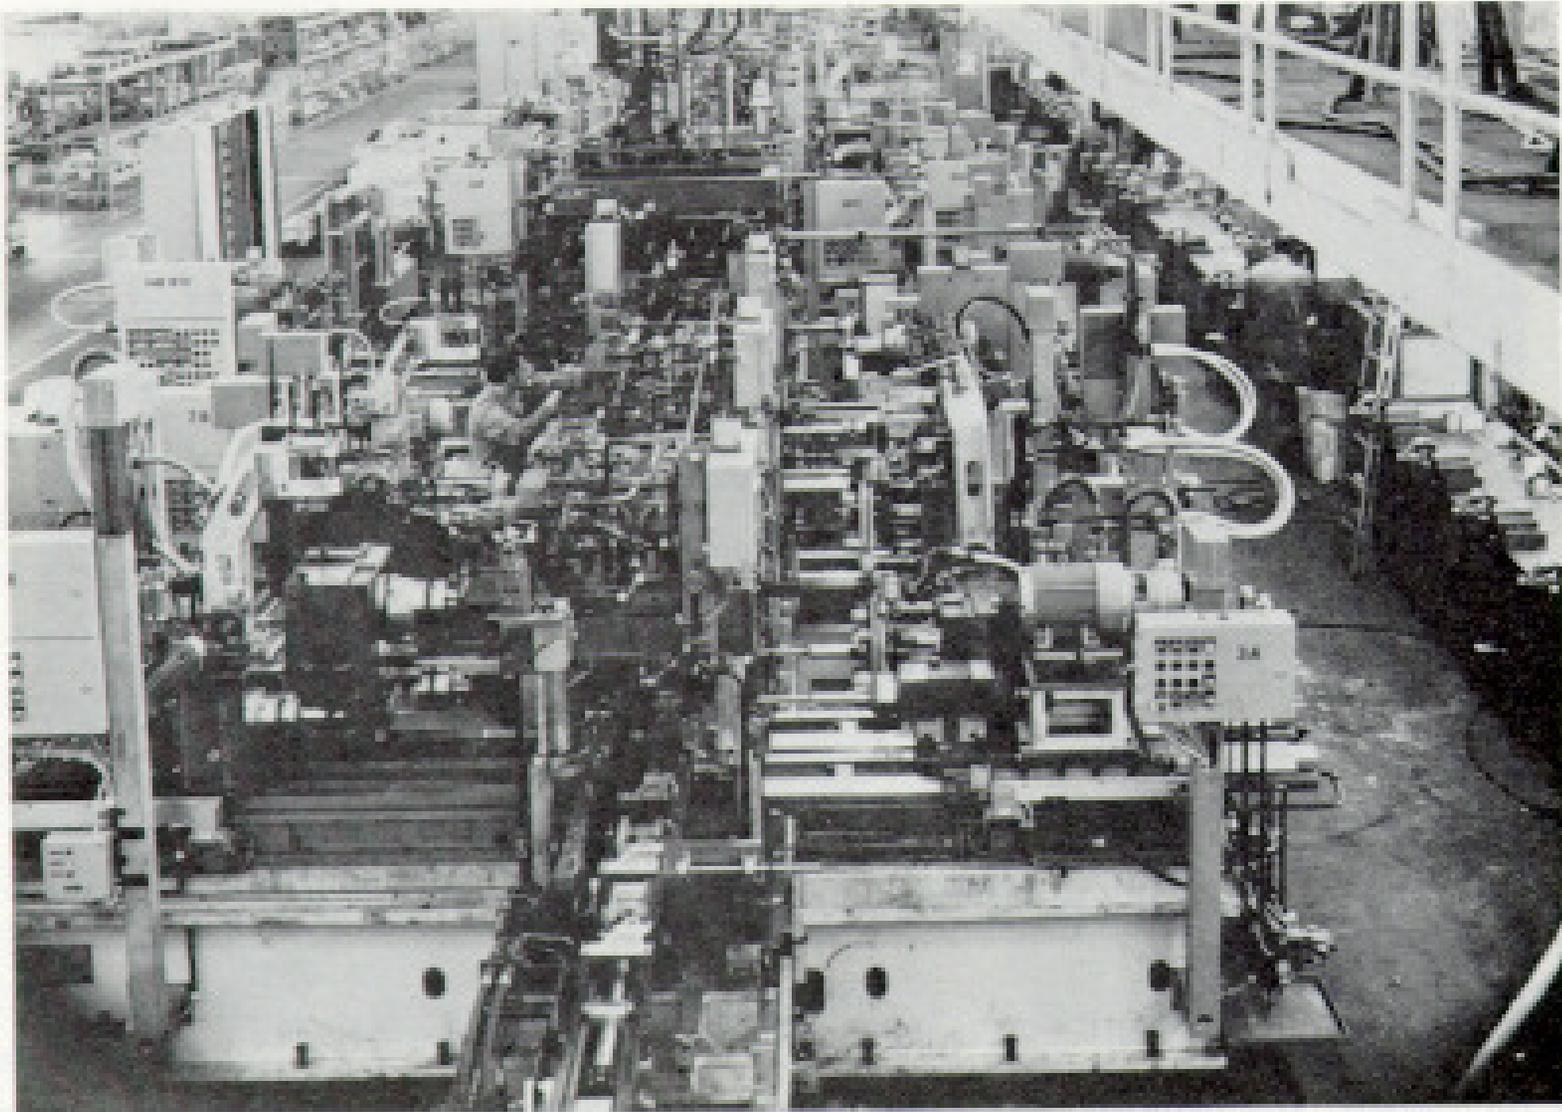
Transfer machine for crank cases (Hüller-Hille)
